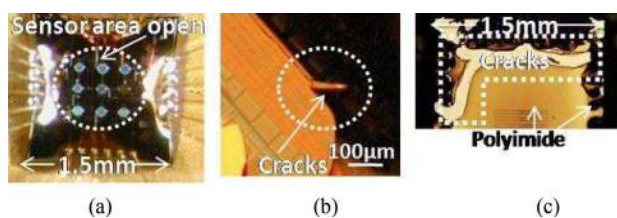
(a) A CMOS chip packaged using SU8 with electrodes exposed. (b) A crack in SU8 observed at the interface of the chip and SU8 where leakage occurs. (c) A polyimide coating on the surface of a packaged chip that cracked after hard baking.
